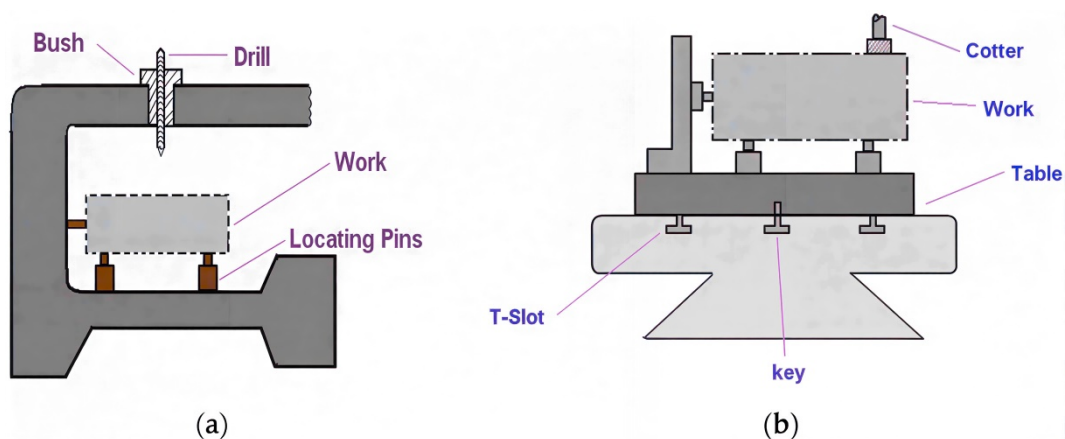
Representative examples of (a) a drilling jig and (b) a machining fixture [20].
